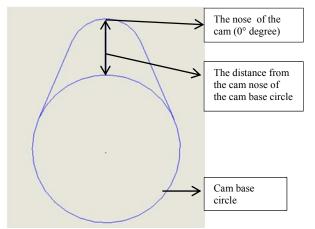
The cut view of the cams on the camshafts and the parts on the cam.
